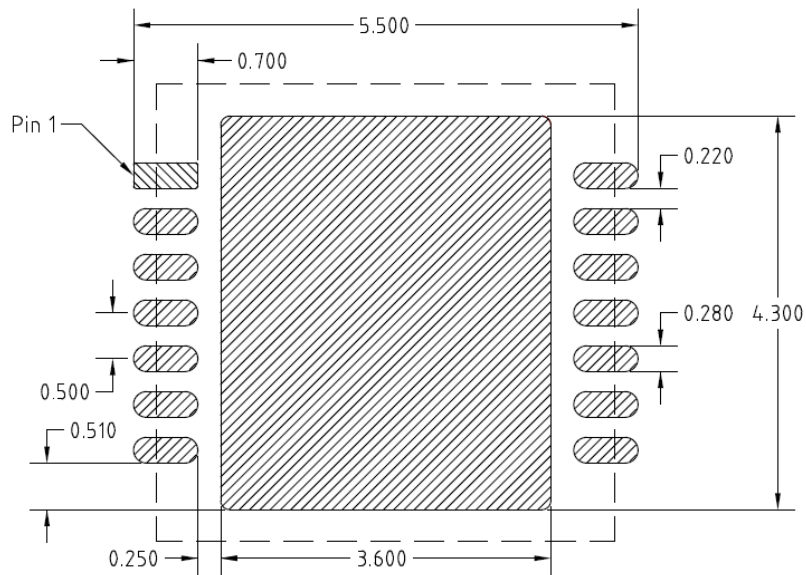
Example of a PCB land pattern for the 5 x 5 x 1.2 mm DFN package (Top view)
